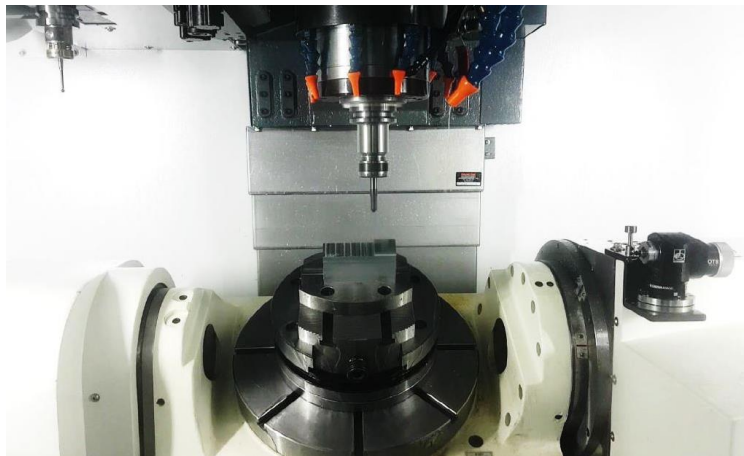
Working space of the five-axis CNC machine tool employed in this study.
